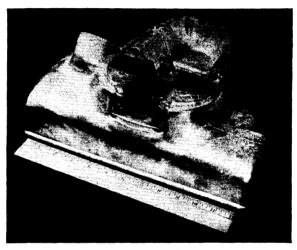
Vacuum-cleaner housing with run marks along the edge (right) and a seam across the top that was caused by a cracked die.
